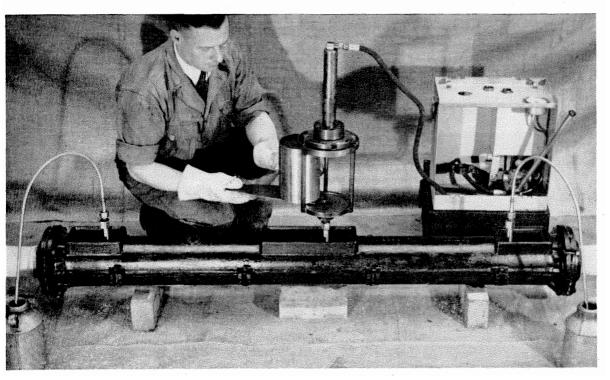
A portable hydraulic extruder is used to fill the sleeve of a 33-kilovolt 3-core styrene joint.
